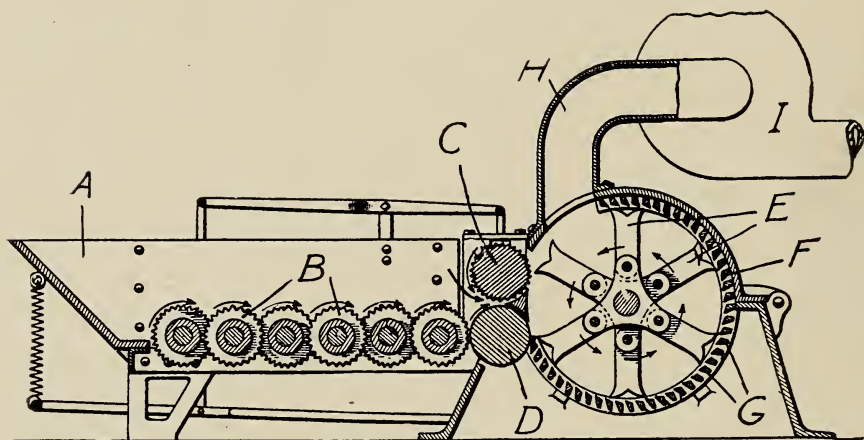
THE WILLIAMS SHREDDING MACHINE.
